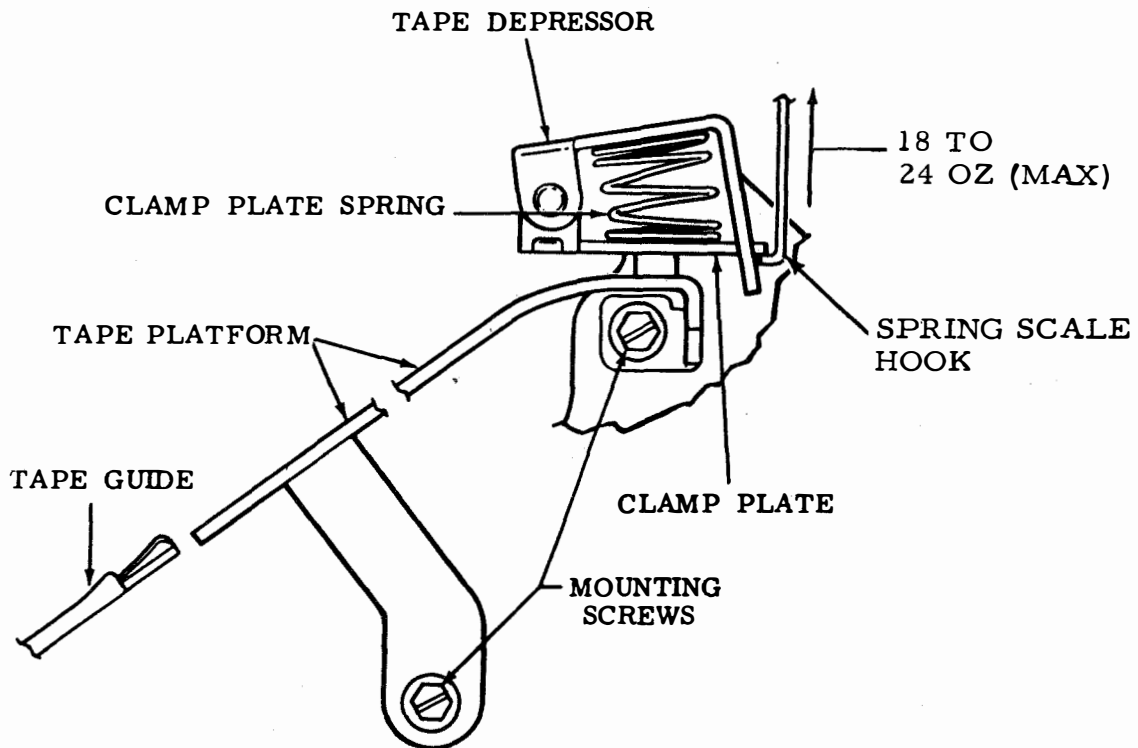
Clamp Plate Spring and Tape Platform, Front View
